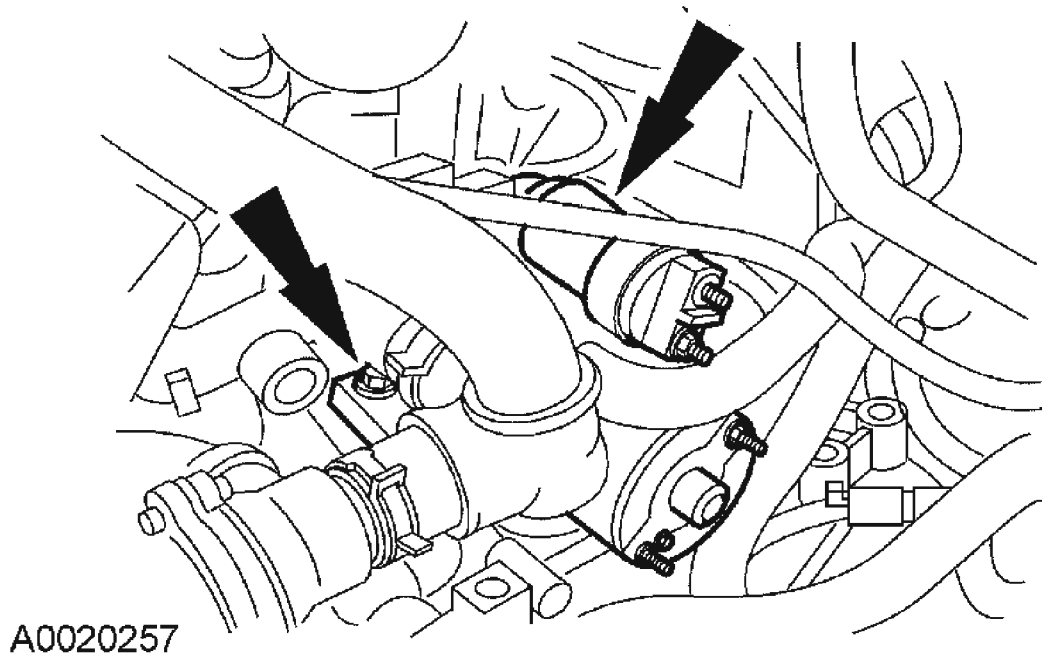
Disconnecting Starter Motor Harness Connector
